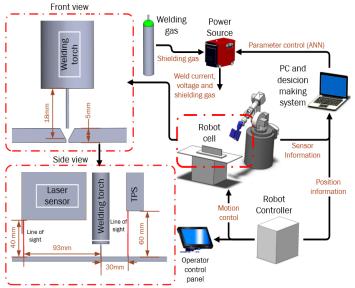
Robot welding equipment in Lappeenranta University of Technology.
